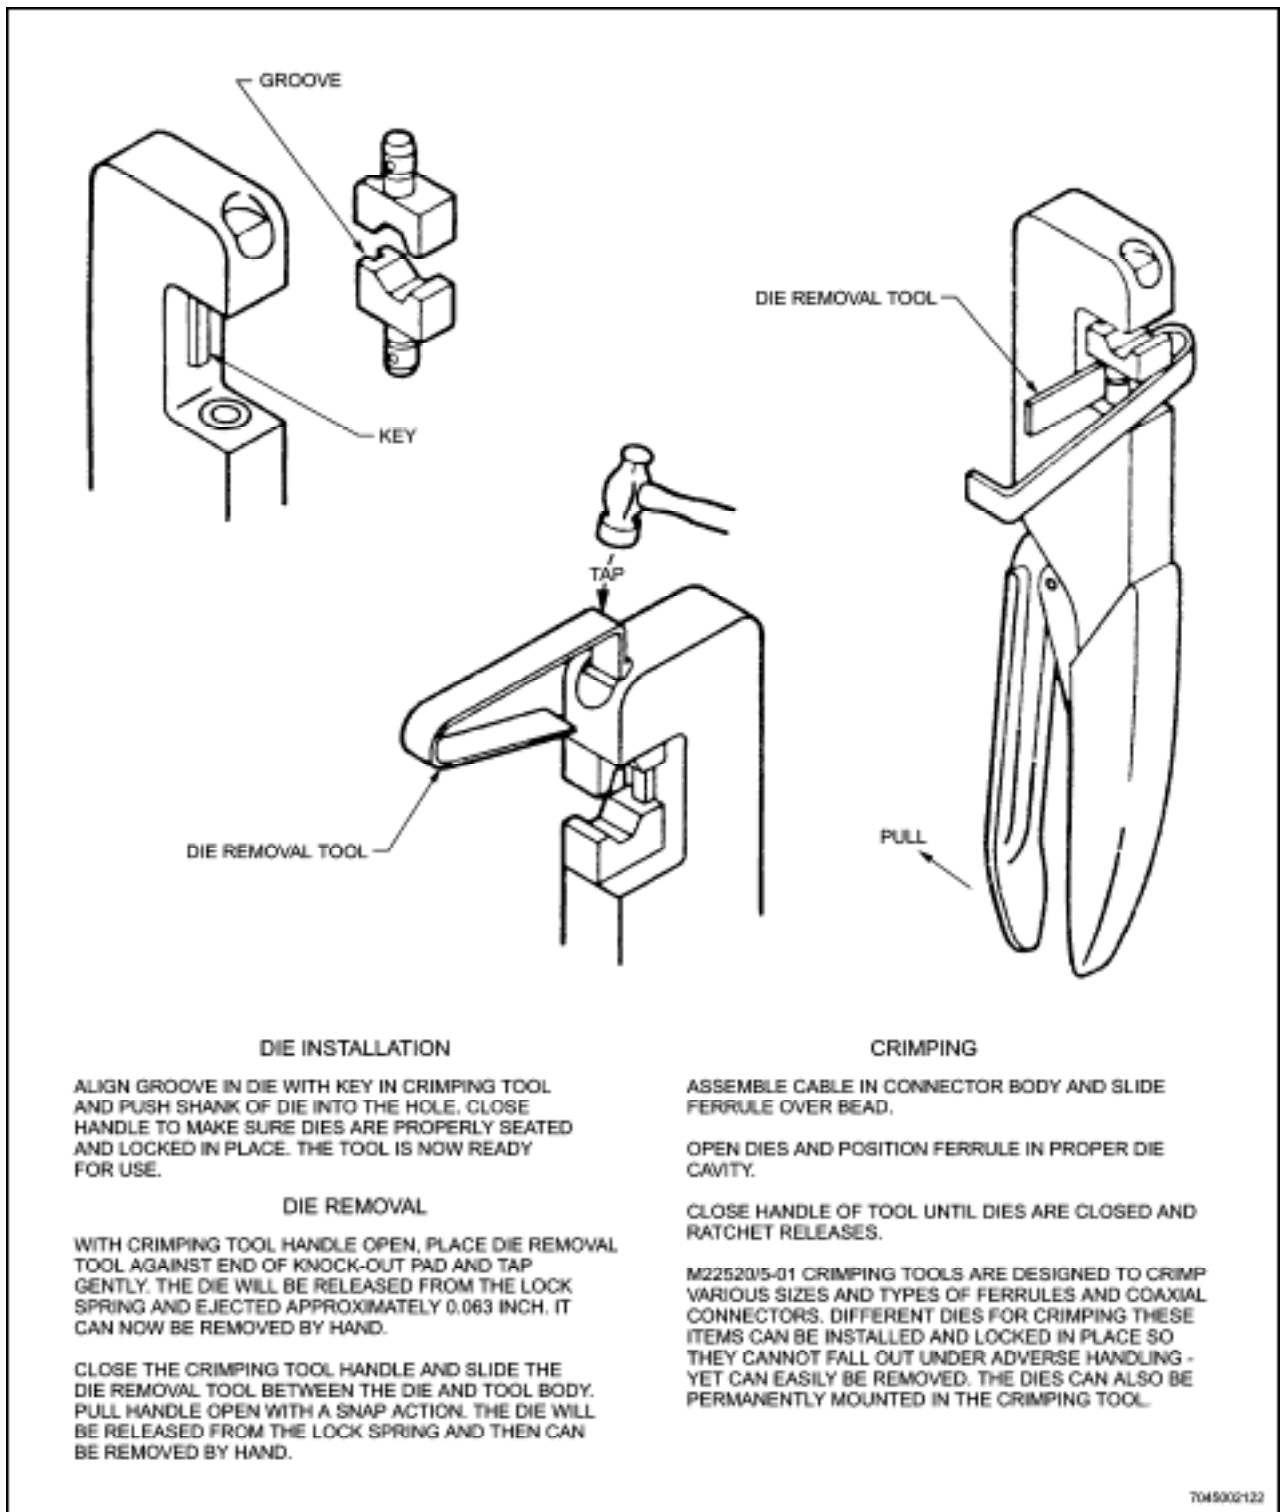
M22520/5-01 Crimping Tool and Hex Dies
